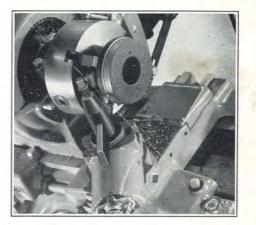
Machining a cast iron collar on the lathe. Note that the cut is deep enough to get beneath
